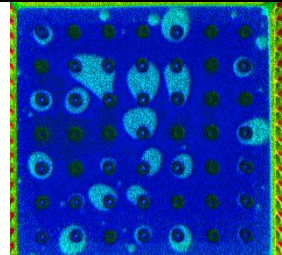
Solder Flow Down to the Bottom of the Circuit Board.
